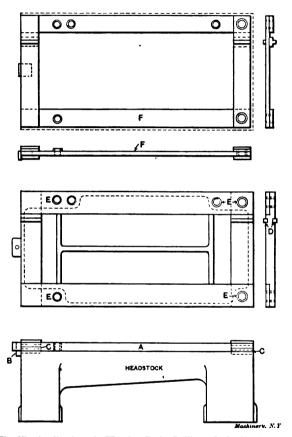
Application of a Wooden Jig for Drilling a Lathe Head-stock.
